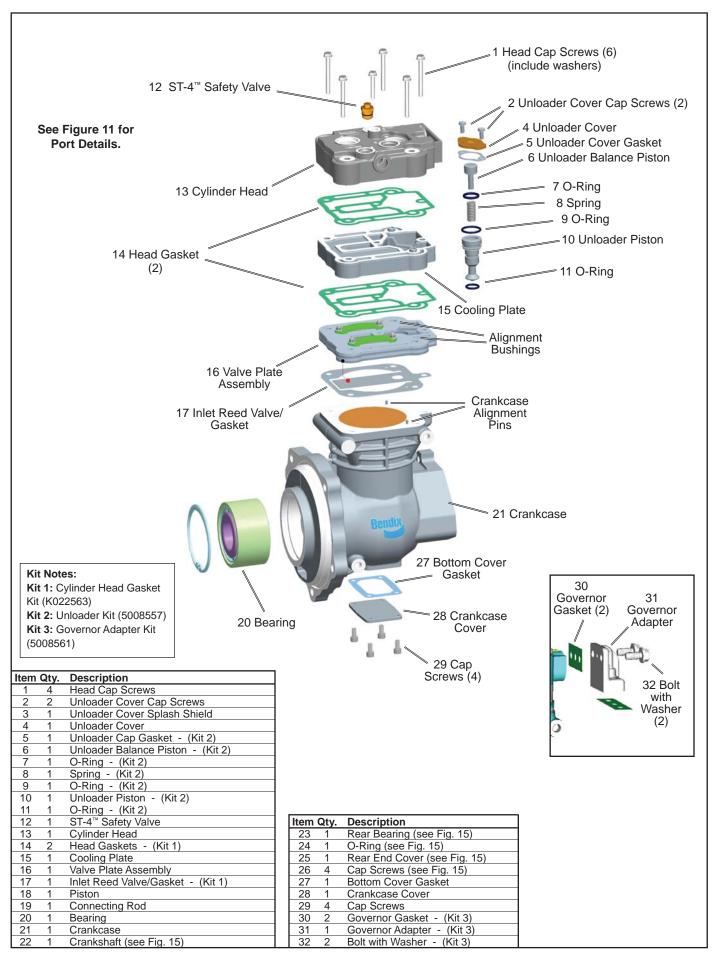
BA-921® CLOSED ROOM COMPRESSOR EXPLODED VIEW.
